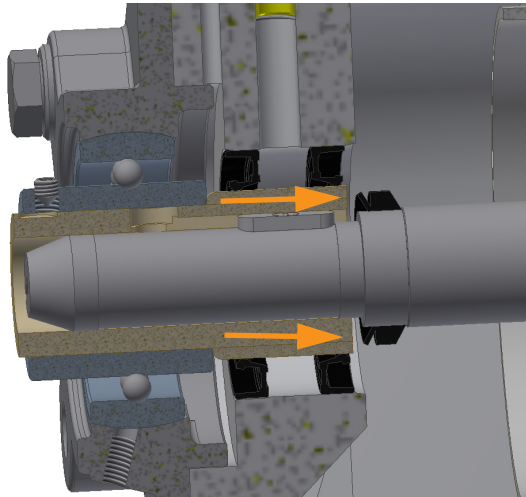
Push bushing up against rotor stop (similar to illustration)
